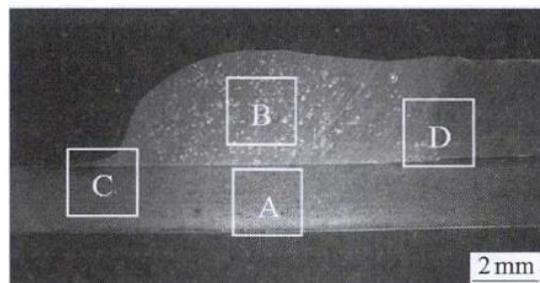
Appearance of 7075 aluminum/galvanized weld-brazed joint
